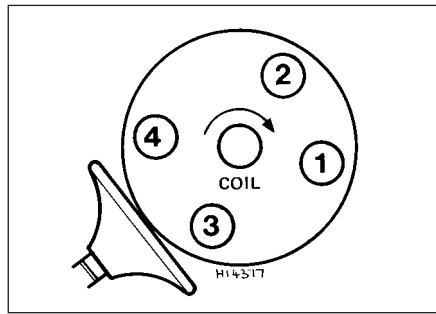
Spark plug connections on 1116 cc and 1301 cc engines (Sec 11)
